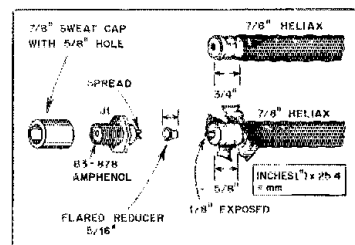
An illustration of the way that Pete O'Dell, AE8Q, suggests for fastening coaxial connectors to 7/8-inch HeliAx cable.
